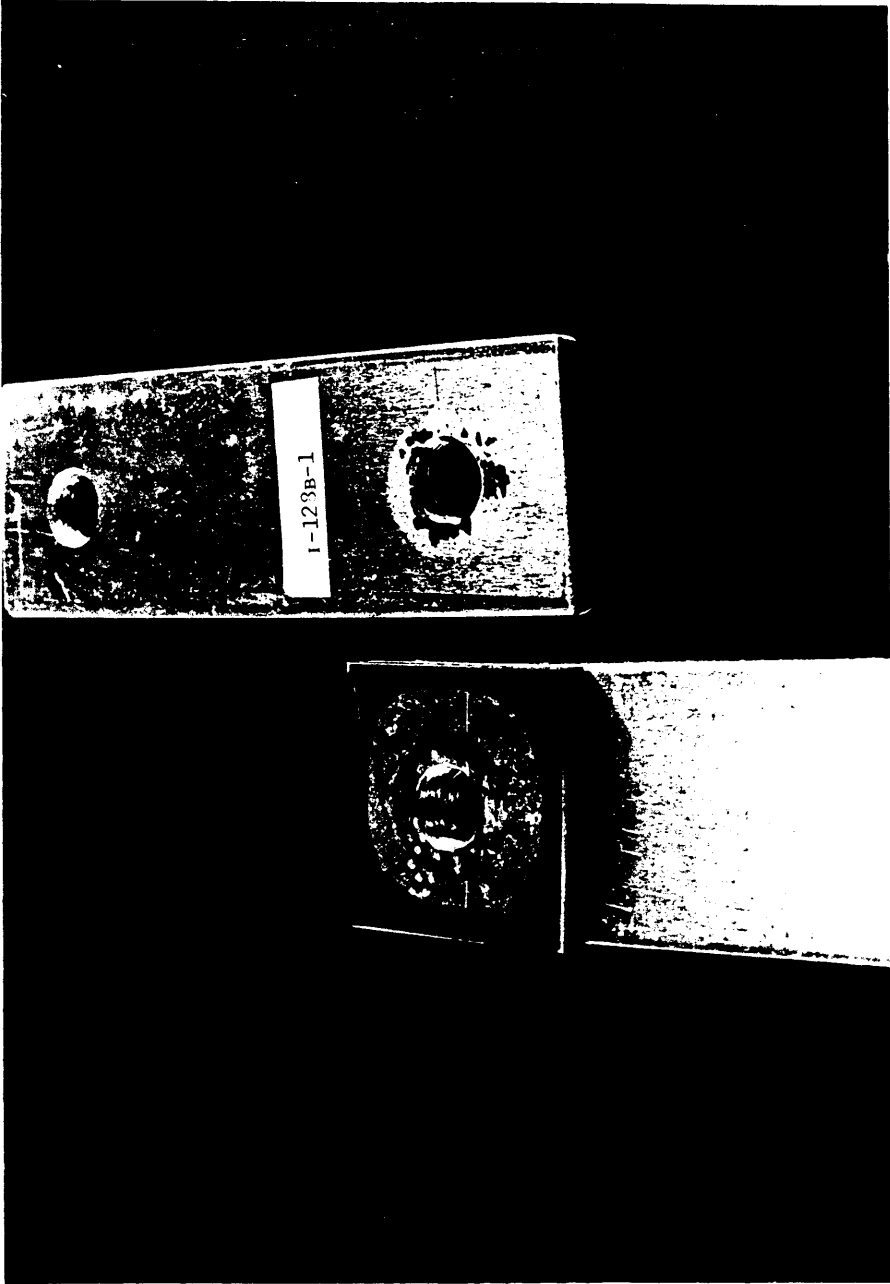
Photograph of Failed Al Bus Joint Specimen Employing Gasket Design.
